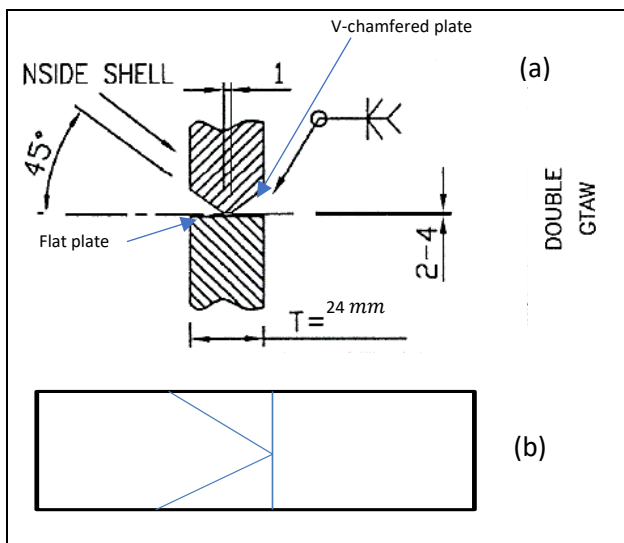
(a) Groove weldment preparation on SAF2205 and AISI304, (b) Side view for single groove and flat plate prepared for welding.
